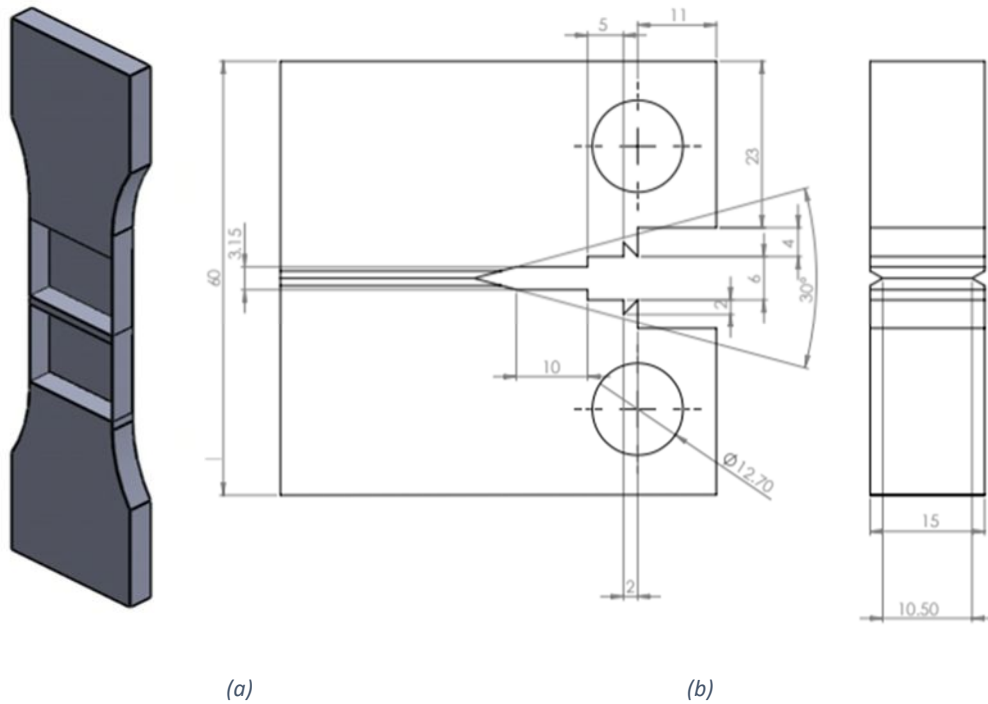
(a) Schematic illustration of the large-scale dog bone pre-straining samples, (b) engineering drawing of the C(T) specimen notch design for fracture toughness testing (all dimensions are in mm)
